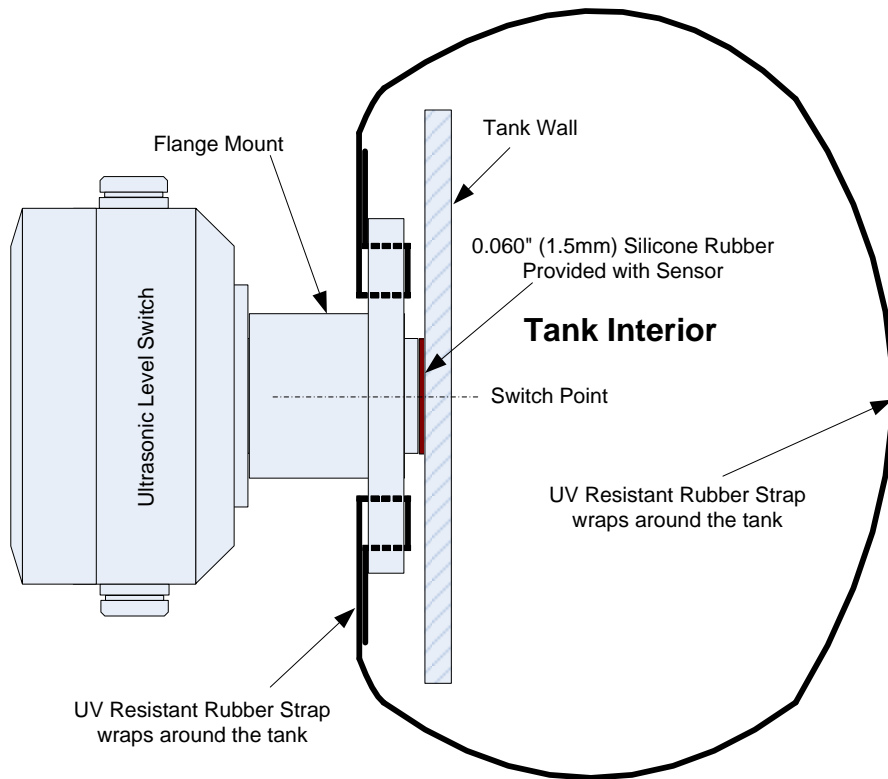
A UV resistant rubber strap is attached to the mounting flange and wraps around the tank.
